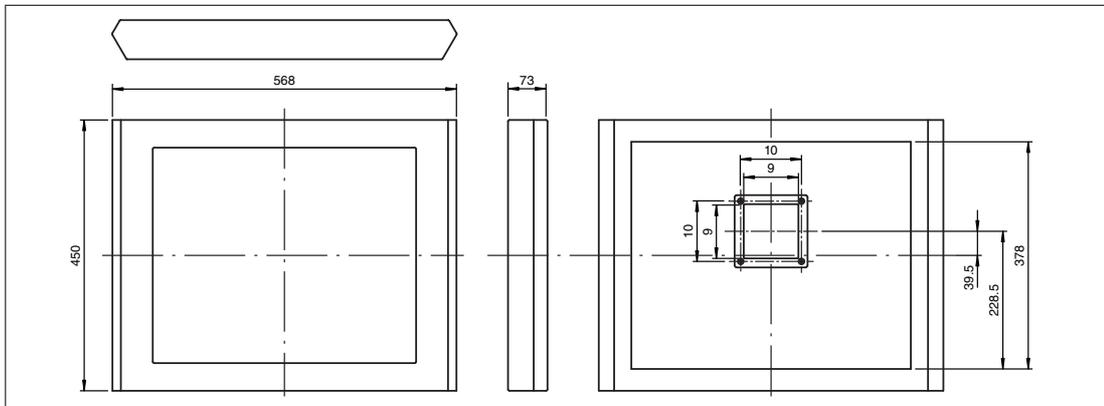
Dimensions VisuNet GMP PC/RM219
